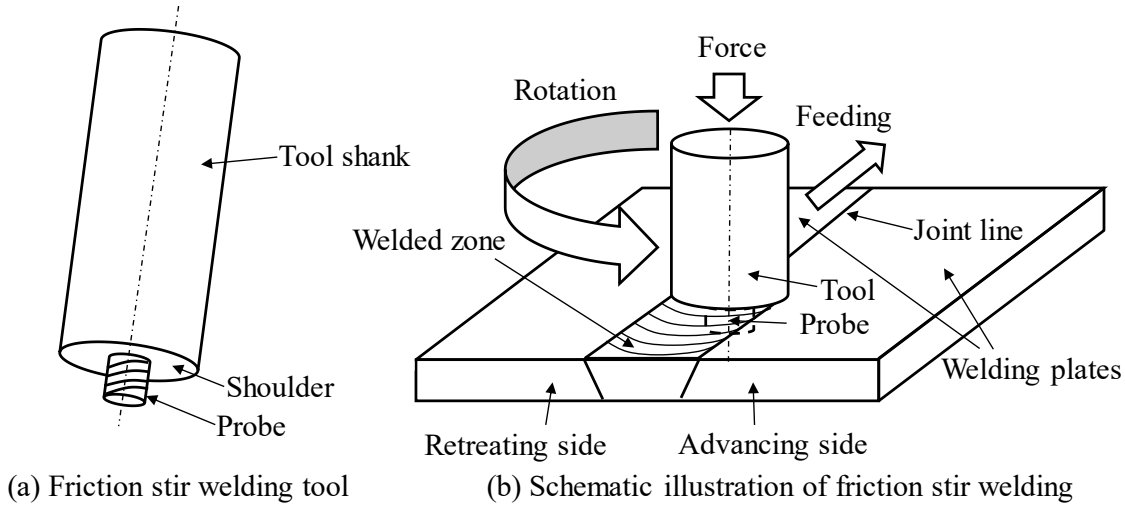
Tool for friction stir welding and schematic illustration of friction stir welding.
